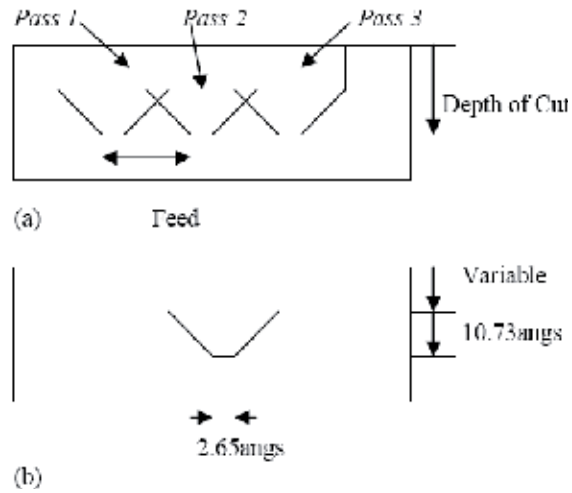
a. Cross Section of the Machined Grooves with Passes 1-3 (direction of cut is perpendicular to the paper face) 16b: Tool Tip Dimensions (Oluwajobi & Chen, 2011b)
